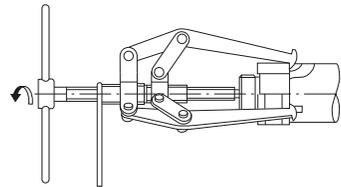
Removal of Inner Ring Using a Withdrawal Tool (2)
